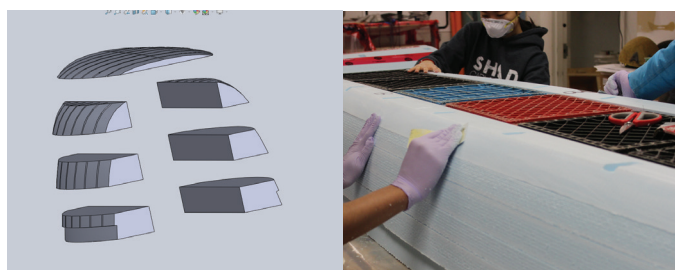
CAD design of foam surrounding the modular core (left), and the mould being assembled and sanded (right). The modular core is the black, blue, red milk crates between the foam pieces
